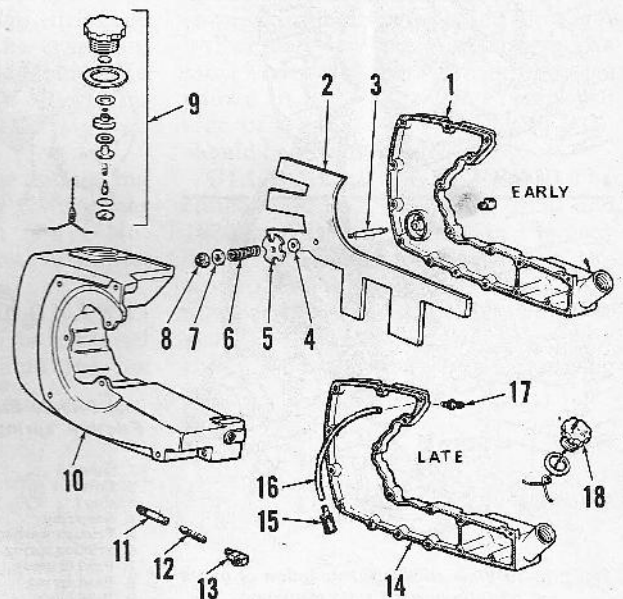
Exploded view of the rear handle and air box typical of all models. A choke is used on some models instead of fuel primer pump (1 thru 11).
